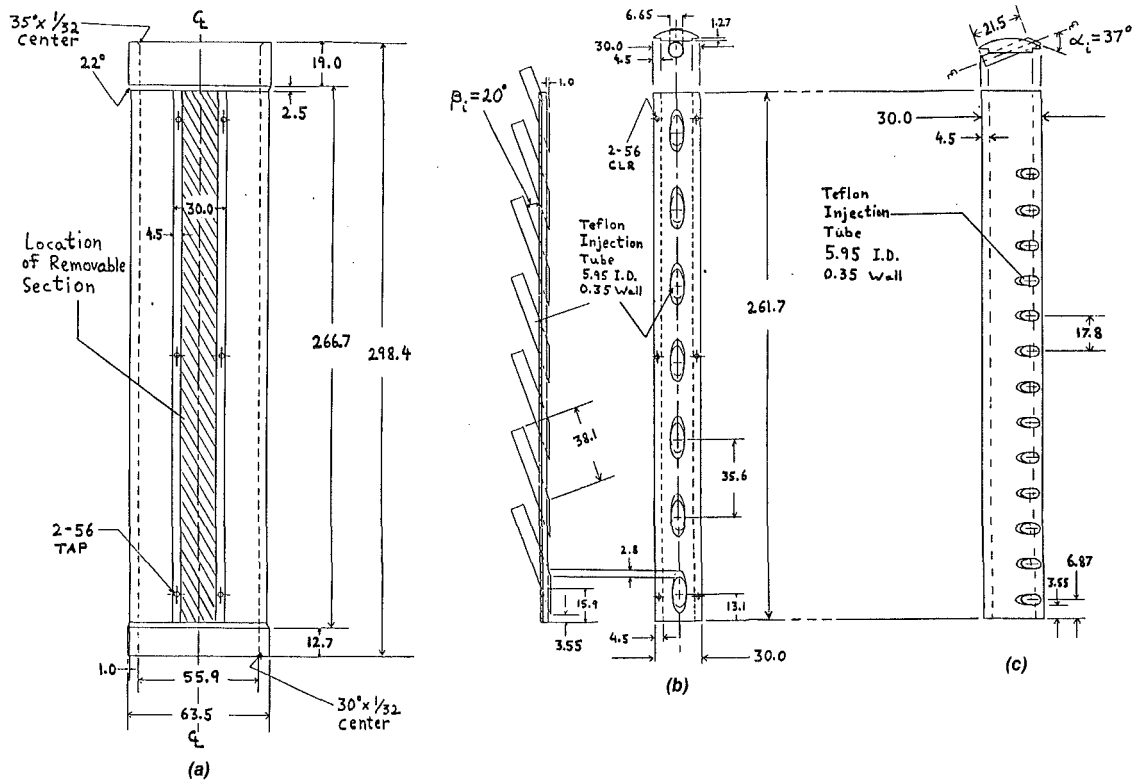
(a) Test cylinder without removable section; (b) removable section with spanwise injection holes; (c) removable section with spanwise injection holes (all dimensions in mm)
